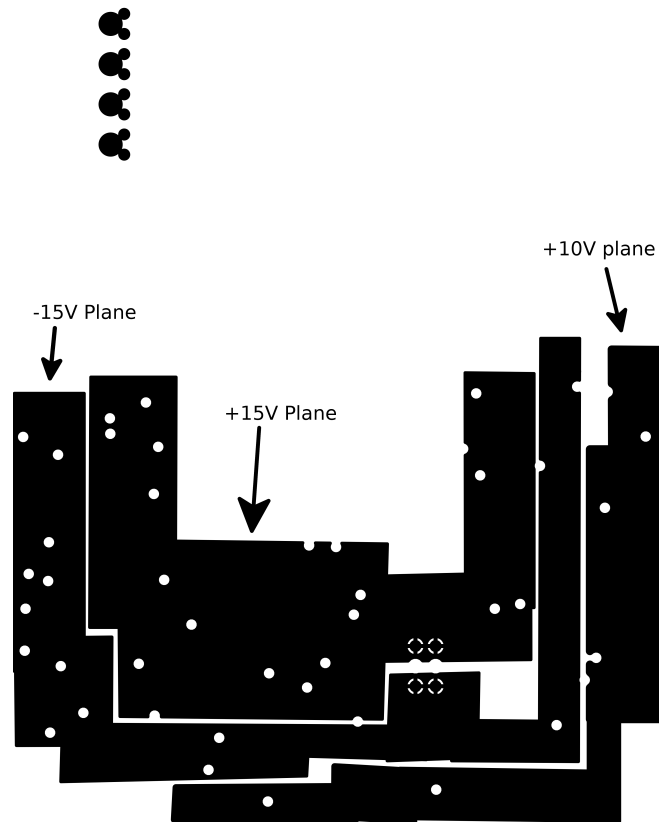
Prototype PCB Power Plane (Second) Layer - Copper Layer View
